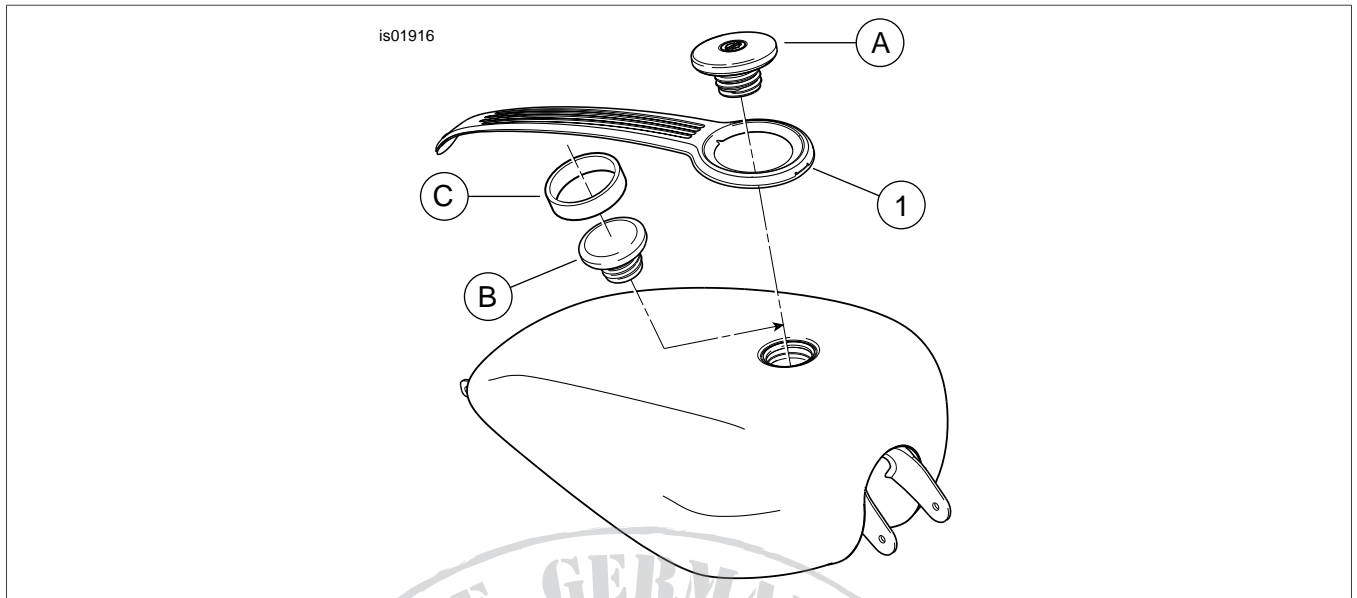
Service Parts: Chrome Fuel Tank Trim Panel (Console)
